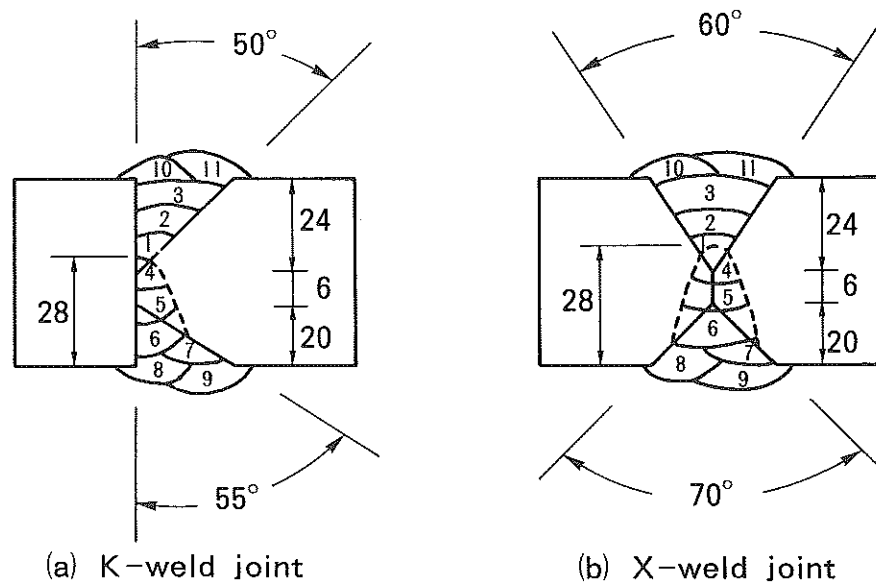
Weld pass sequence of 'K' and 'X' weld joint
